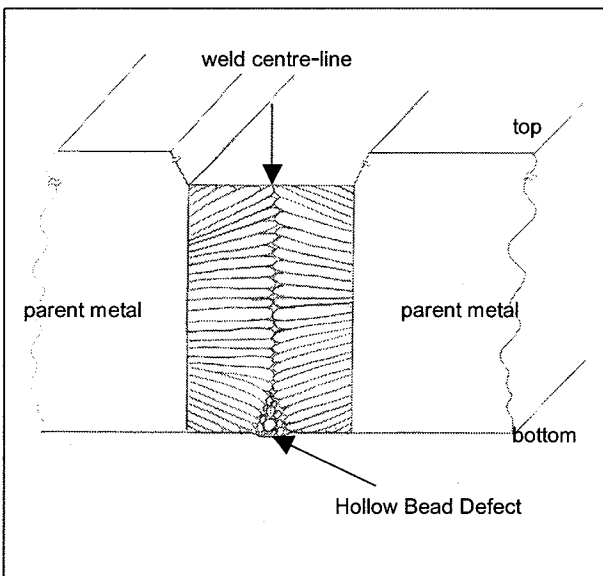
Schematic of a transverse cross section of a weld containing Hollow Bead Defect in the root pass.
